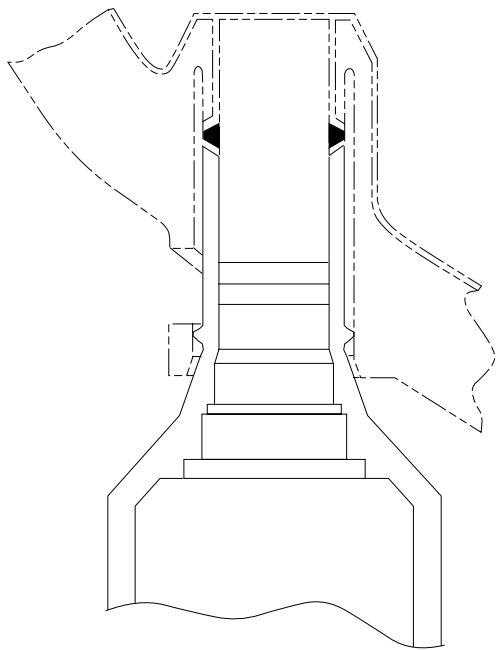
Reactor Internal Pump Motor Casing Including Weld to RPV
